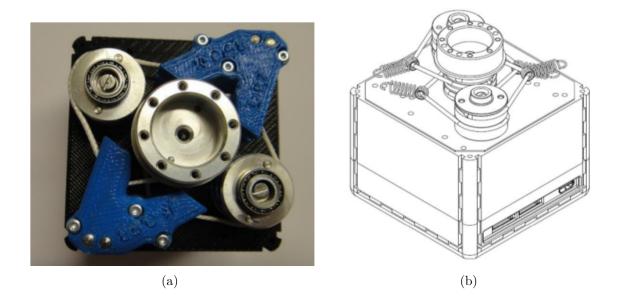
(a) - Real image of motor, (b) - CAD of the motor.
